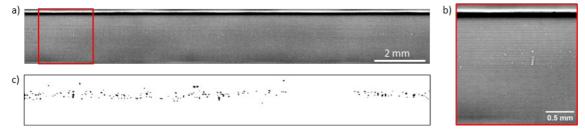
a) X-ray scan of a sample welded with 300 W in the center spot and 1200 W in the ring spot, b) enlarged view of a part with pores, c) binary image with marked pores
